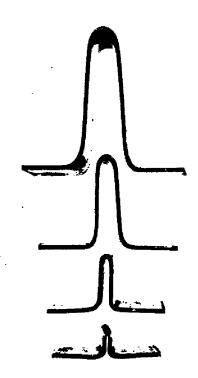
Deformed Specimens To various bend radii D-43 Material .030 Gage
